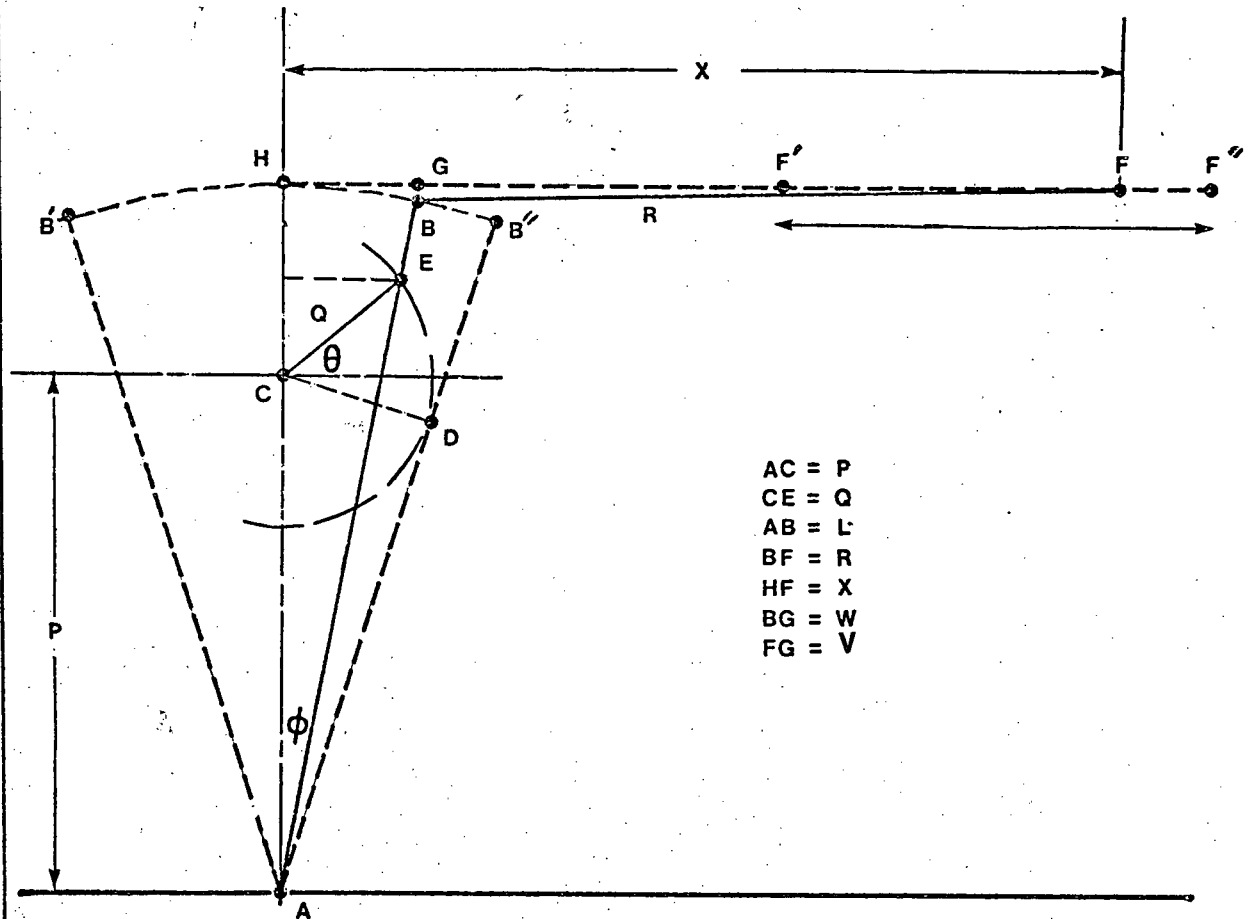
DRIVE MECHANISM OF IMPACTING PRESS
